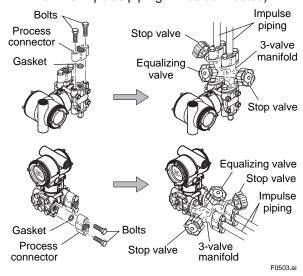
3-Valve Manifold (Direct-Mounting Type)
